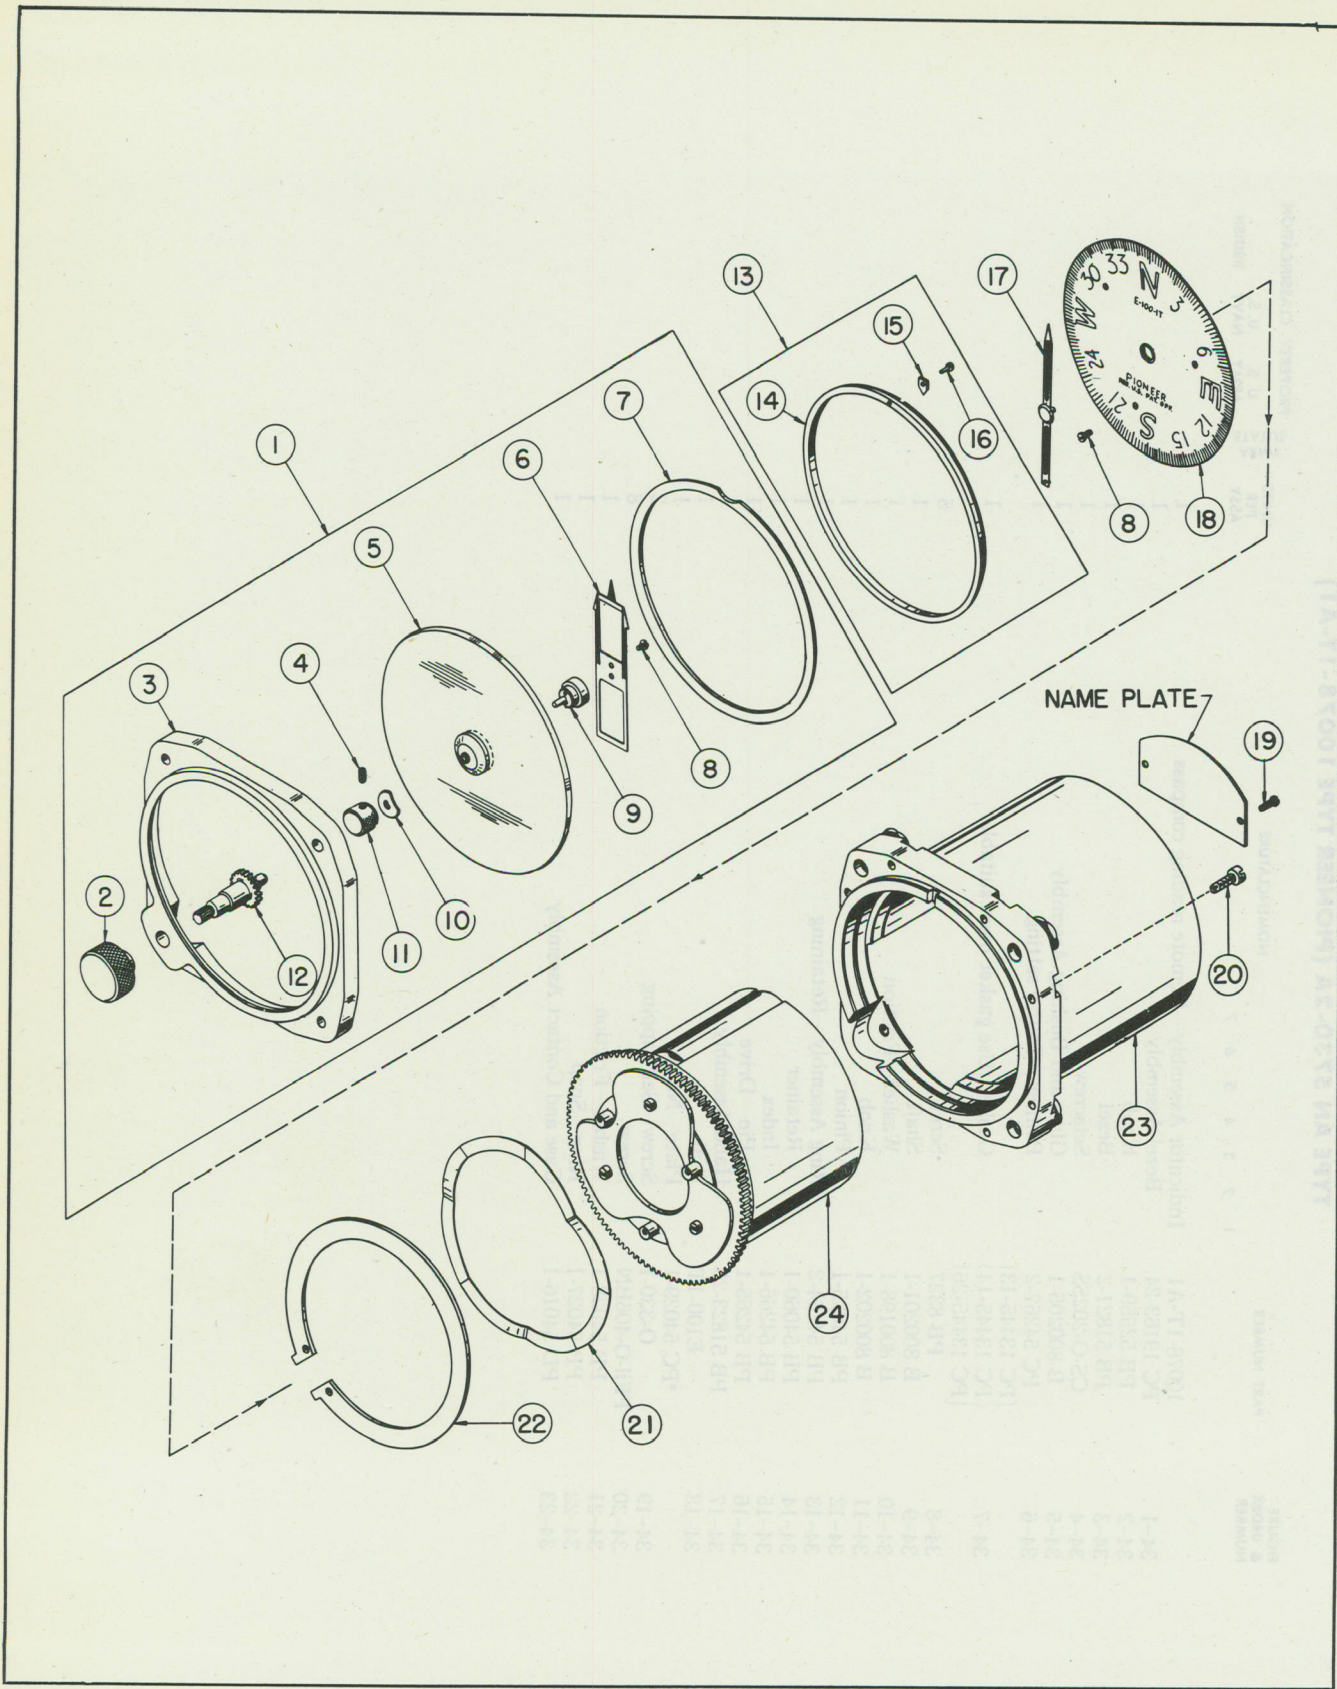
Exploded View—Main Assembly—Indicator—Type AN 5730-2A,
